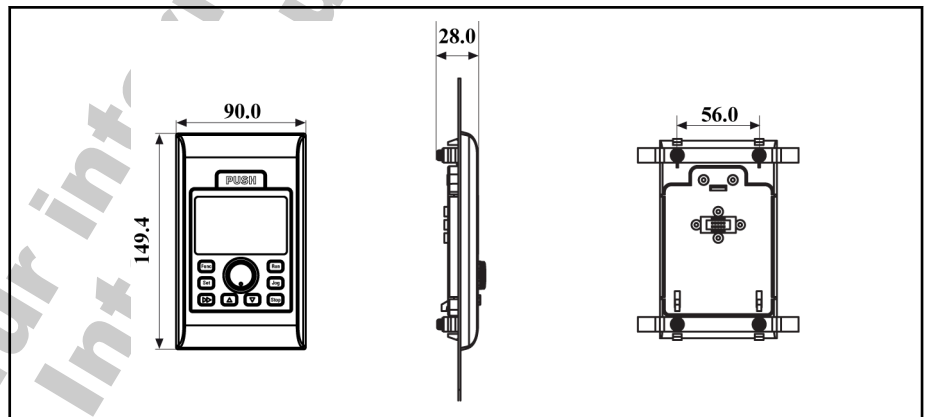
Mounting of operating panel at the control cabinet with mounting plate
